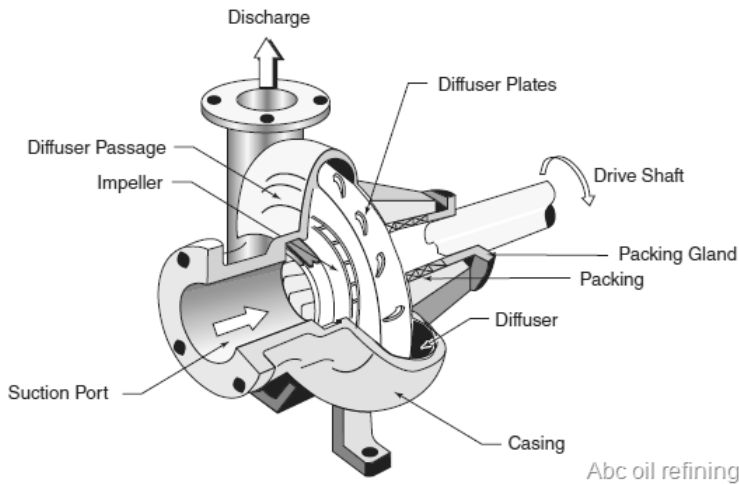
The components making up the centrifugal compressor (ME Mechanical, <http://me-mechanicalengineering.com>)
